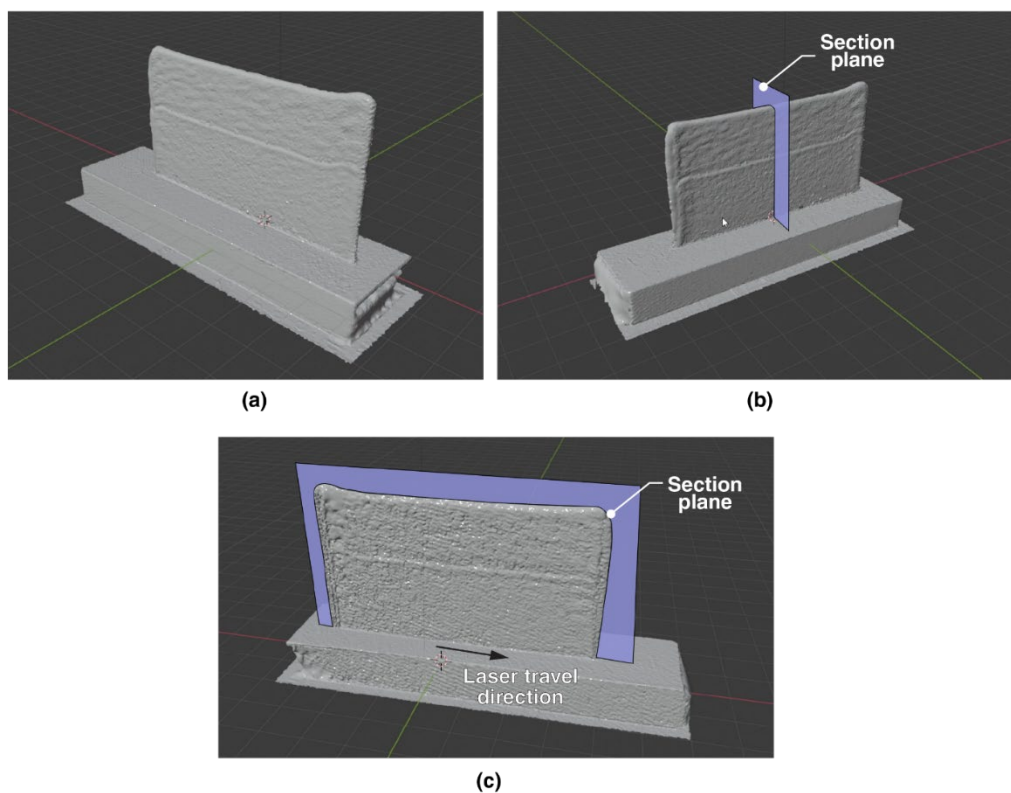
(a) 3D scanned model of thin wall, (b) section plane considered for measurements along the cross-section and (c) section plane considered for measurement along the laser travel direction
